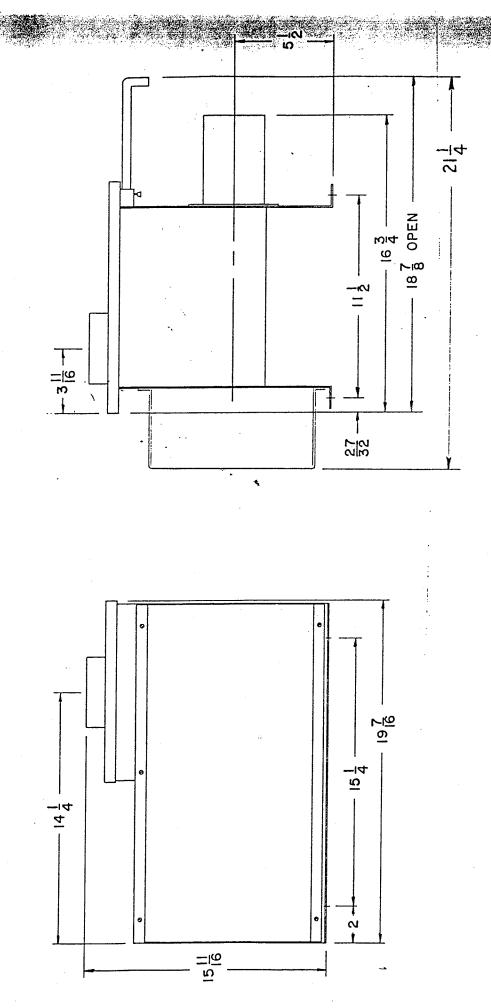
INLET HOPPER MAJOR DIMENSIONS
